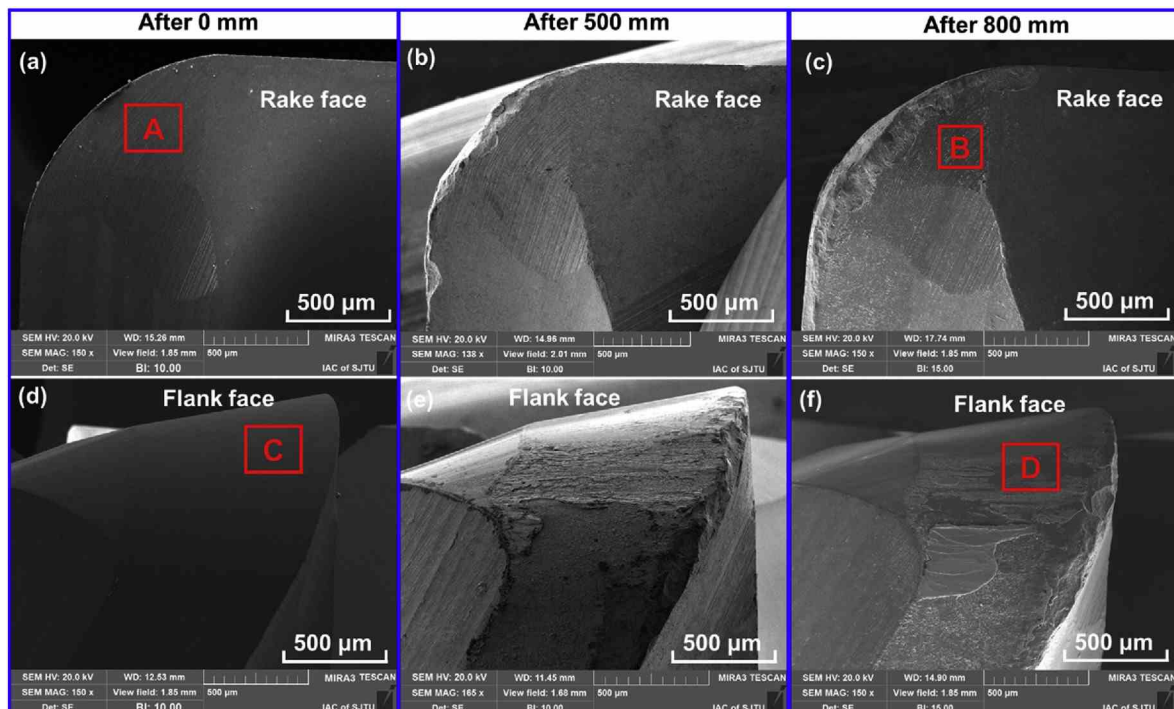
SEM micrographs of the tool rake face and flank face after 0, 500 and 800 mm slot milling tests.
